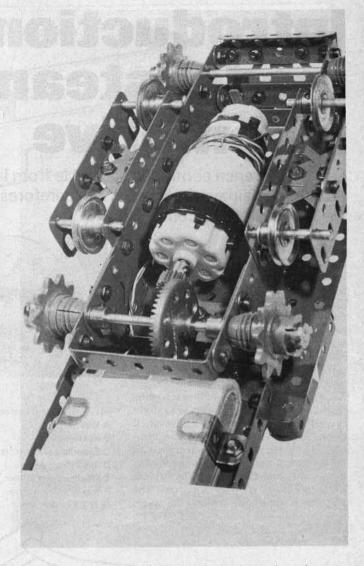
General construction of the chassis showing track running gear and sprocket drives.
